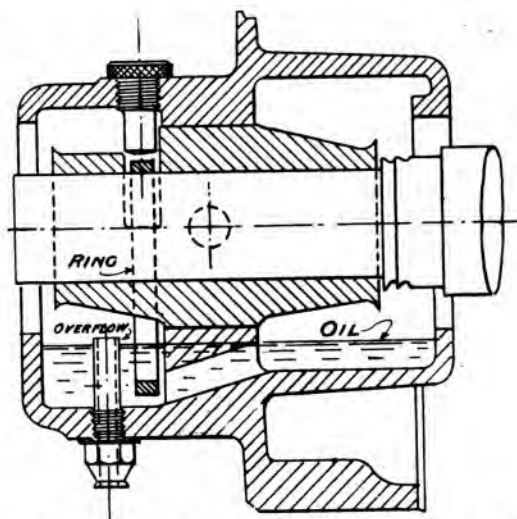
Loose Ring Method of Lubricating Motor Bearing.
